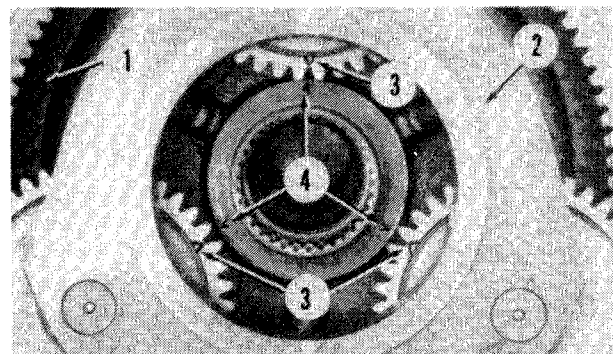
Timing marks on pinion gears (3) must be aligned with timing marks on ring gear hub (4) when reinstalling input planetary.
